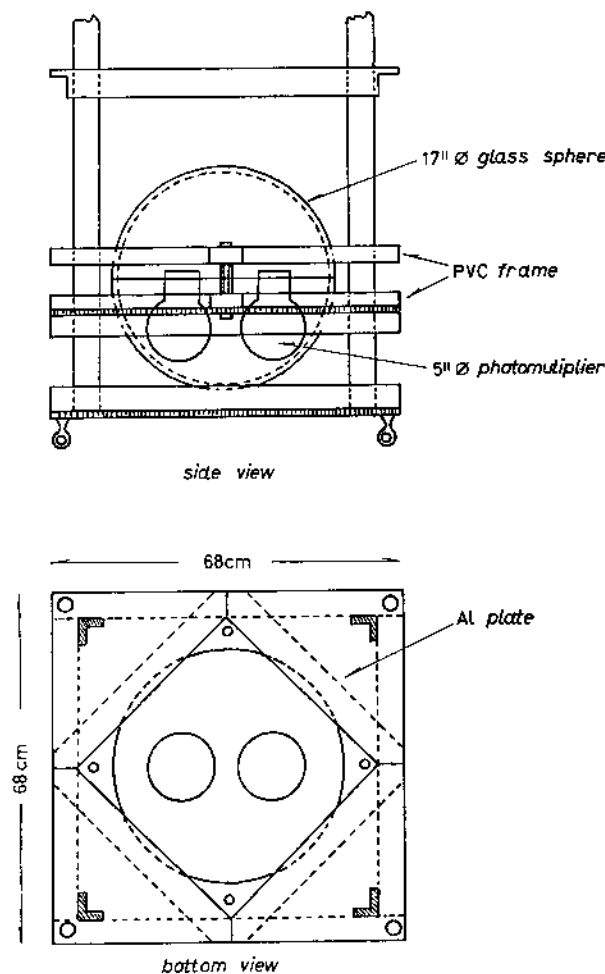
Construction of light sensor. Two 5" \varnothing photomultiplier tubes are mounted side by side in a deep sea glass sphere.
